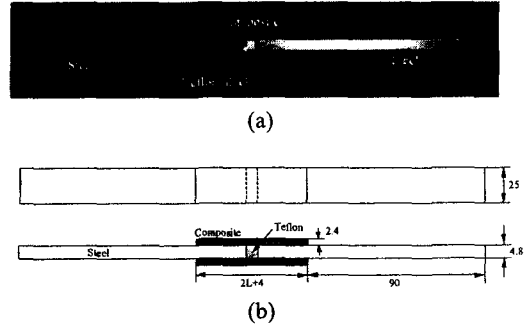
A co-cured double lap joint specimen. (a) Photograph and (b) shape and dimensions.
